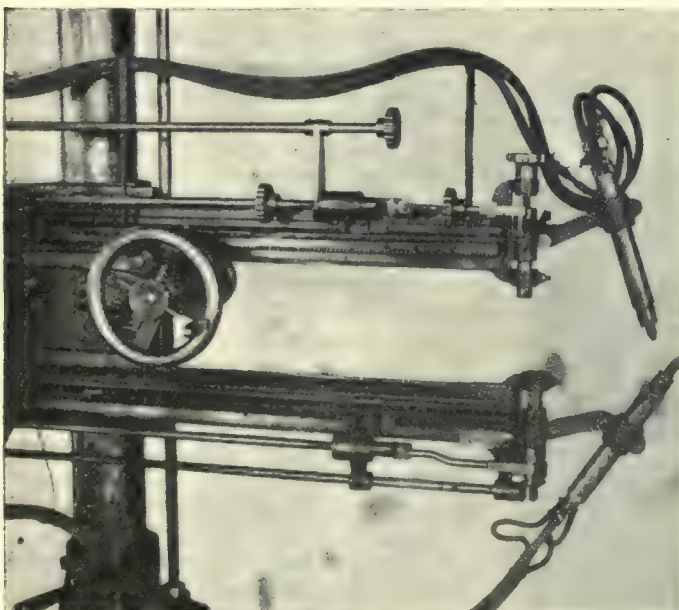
DETAIL VIEW OF TORCH CARRYING APPARATUS ON BARREL-WELDING MACHINE.
